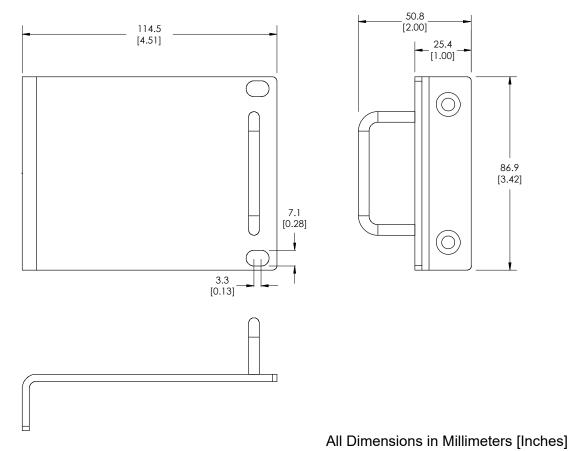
NC-12 Rack Mounting Bracket Mechanical Drawing
